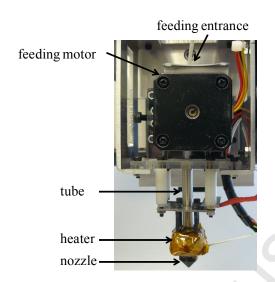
The FDM extruder including the feeding mechanism, the heater, and the nozzle
